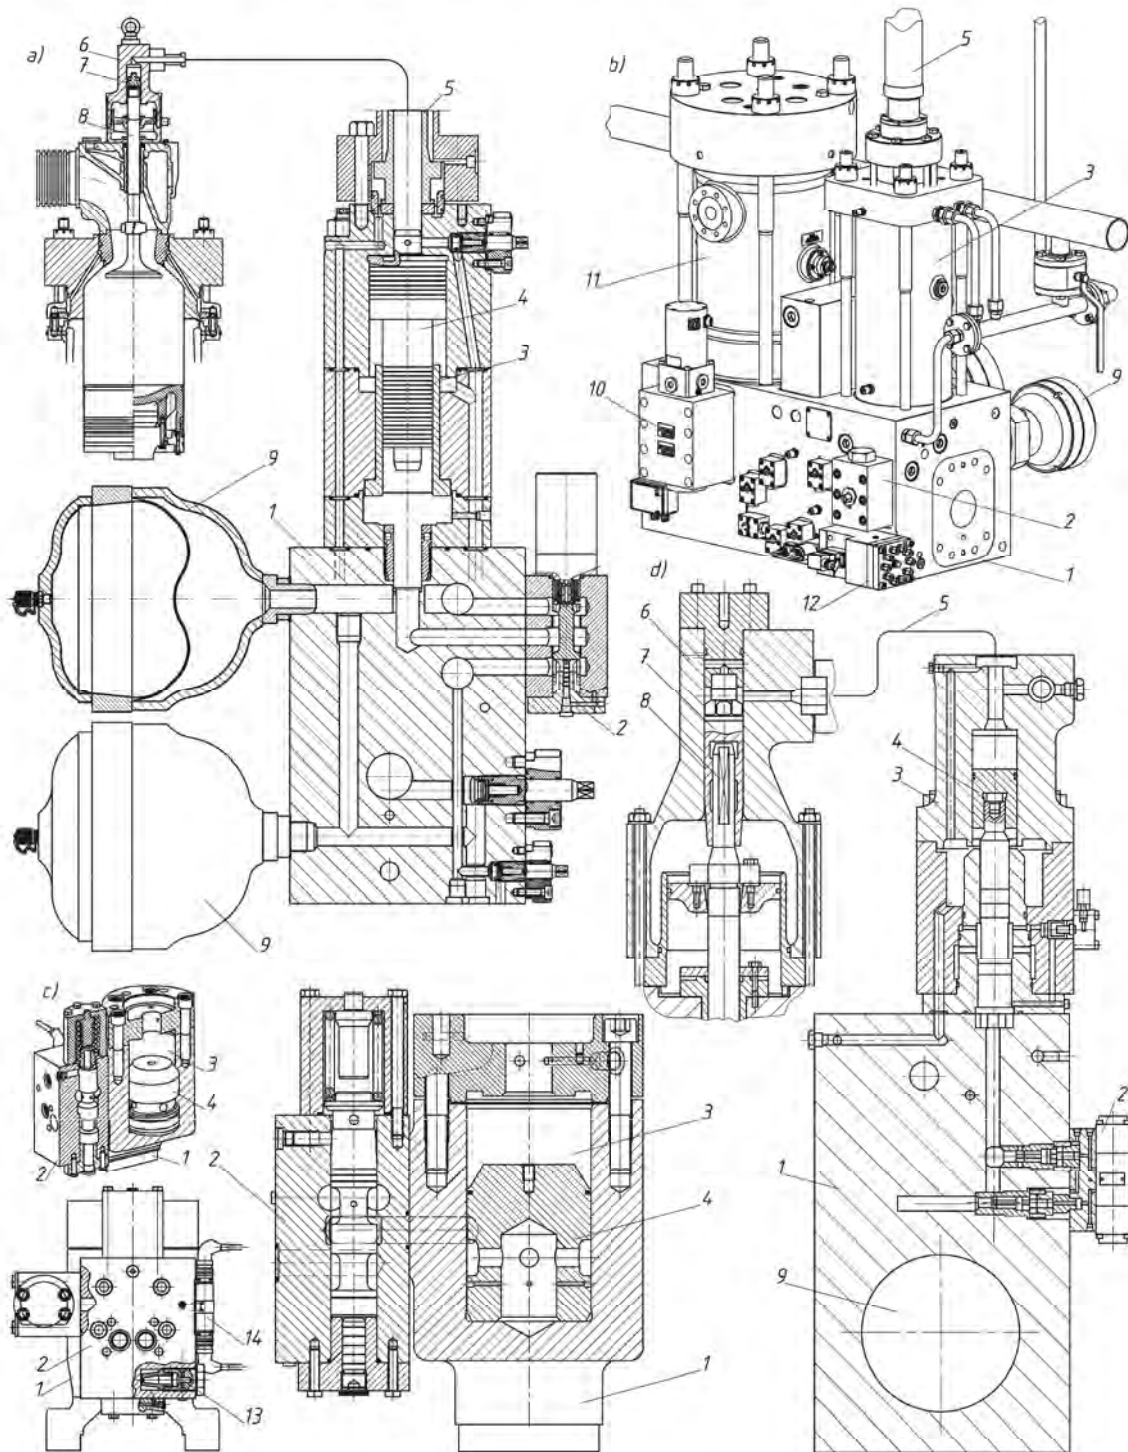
Hydraulic drive of gas distribution mechanism actuators: *a* – engines ME series K, L, S from MAN; *b* – general view of the hydraulic block of MAN ME engines from the valve drive actuator side; *c* – general view and longitudinal section of the hydraulic actuator for diesel engines of the RT-flex series from Wärtsilä; *d* – engines of the UEC Eco-Engine series from Mitsubishi: 1 – hydraulic unit housing; 2 – control spool for the exhaust valve actuator; 3 – hydraulic cylinder; 4 – actuator piston; 5 – high pressure hydraulic line; 6 – hydraulic cylinder of the valve drive; 7 – valve drive piston; 8 – exhaust valve stem; 9 – pressure accumulator; 10 – spool control of the fuel pump actuator; 11 – fuel pump actuator; 12 – lubricator block; 13 – control oil filter; 14 – block of electrically controlled valves (adapted from [25, 26, 27, 28])
